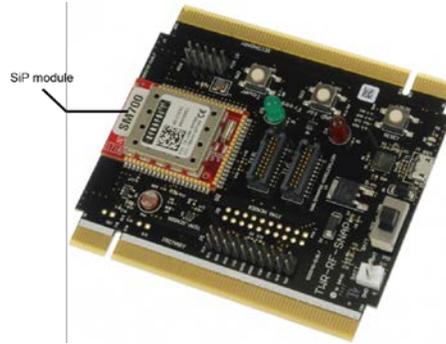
Post stamp SiP module soldered. From [Element 14-12]
